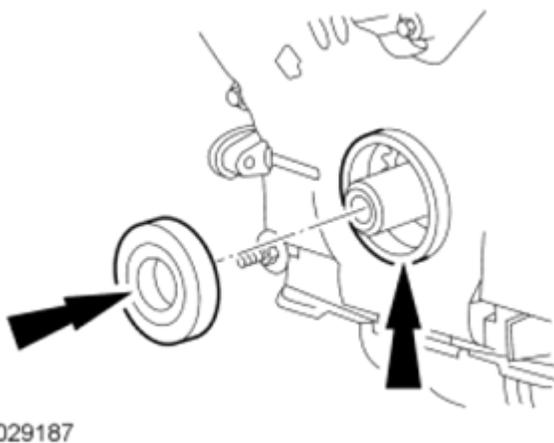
Lubricating Engine Front Cover And Crankshaft Seal Inner Lip With Clean Engine Oil
